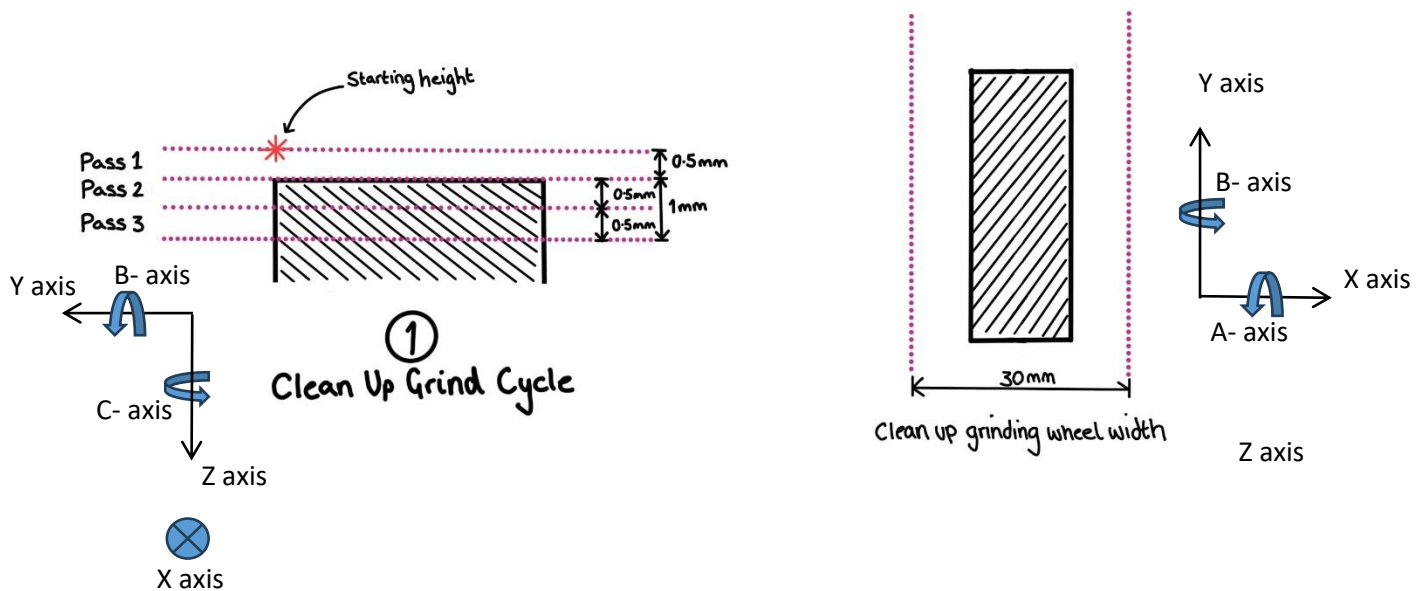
Clean up grinding cycle used within the grinding trial to prepare all sample workpiece coupons before they are subjected to grinding trials. Sketch shows the coordinate system used to represent the motion while grinding with respect to the machine.
